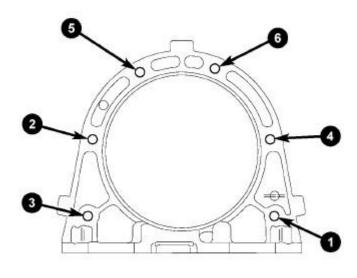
REAR COVER TORQUE Courtesy of CHRYSLER LLC
